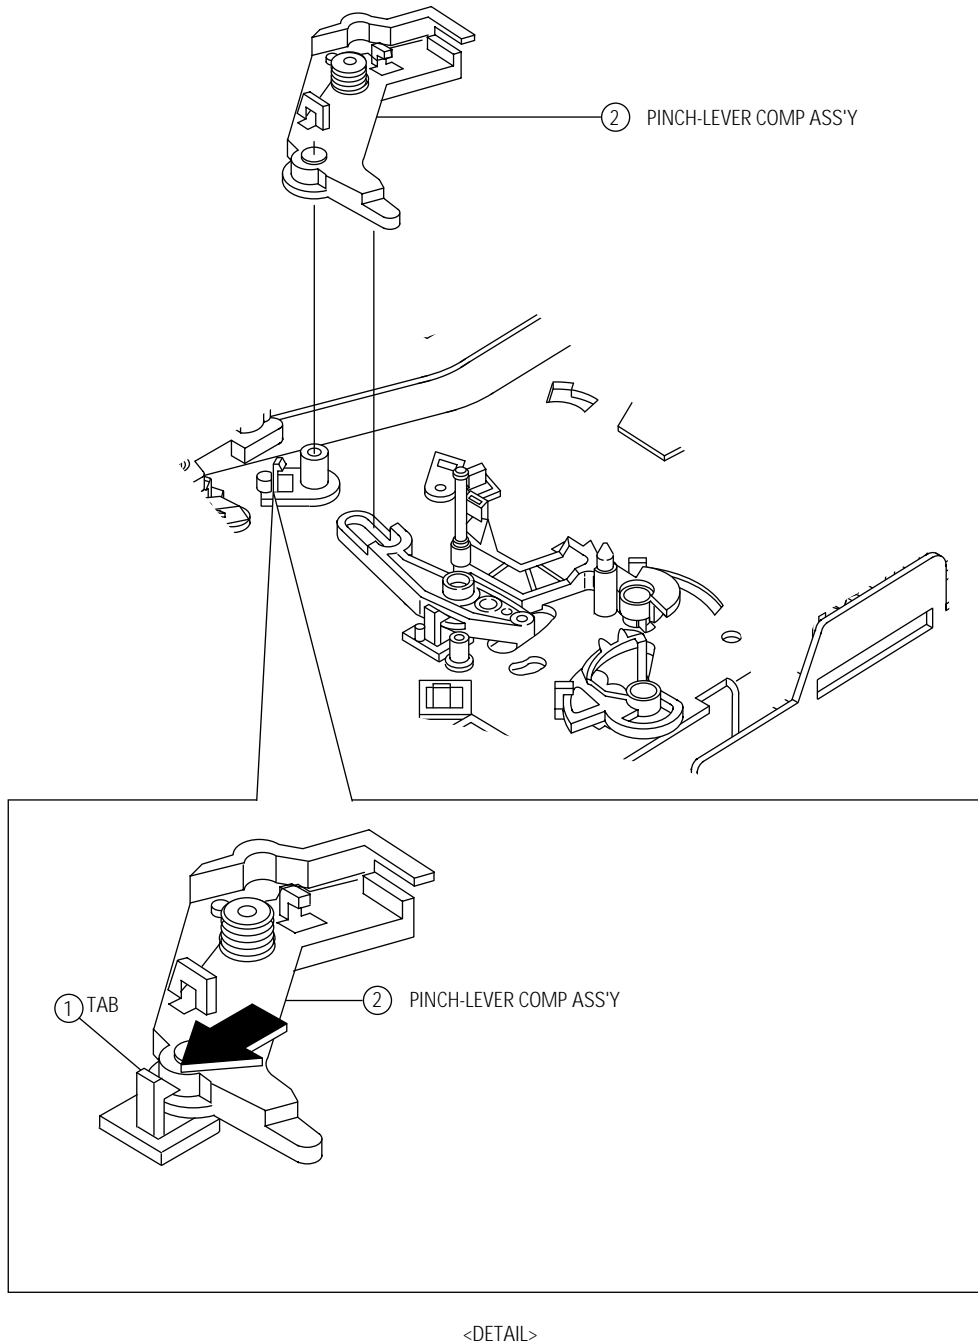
Pinch Lever Comp Ass'y Removal
